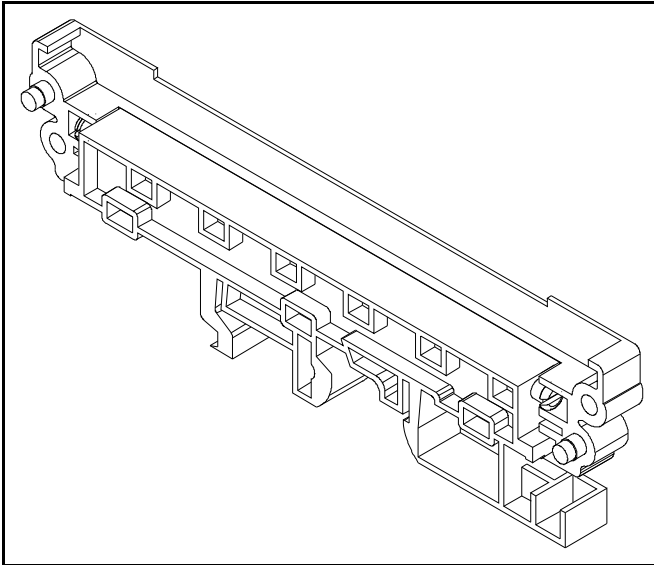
RAIL GUIDE INSERT IN THE END PIECE
